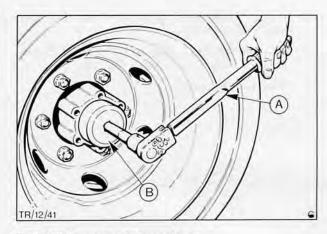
Tighten nuts with special tool A – Torque wrench B – Special tool no. 15–029 ('G' axle shown)
